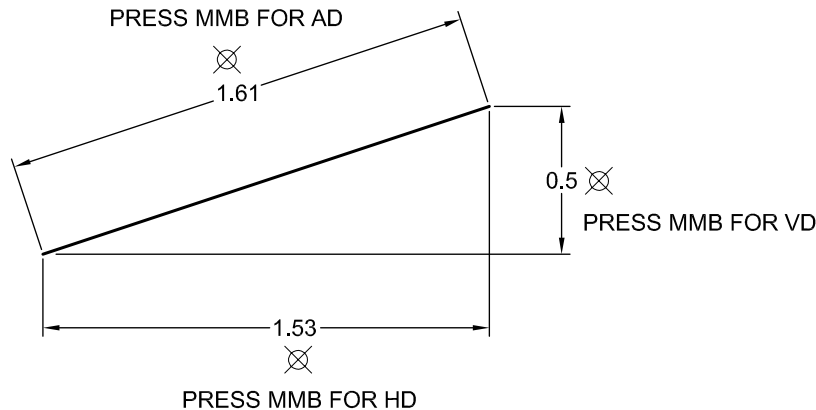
shows the three possible orientations of dimension that can be displayed when you dimension a line.
